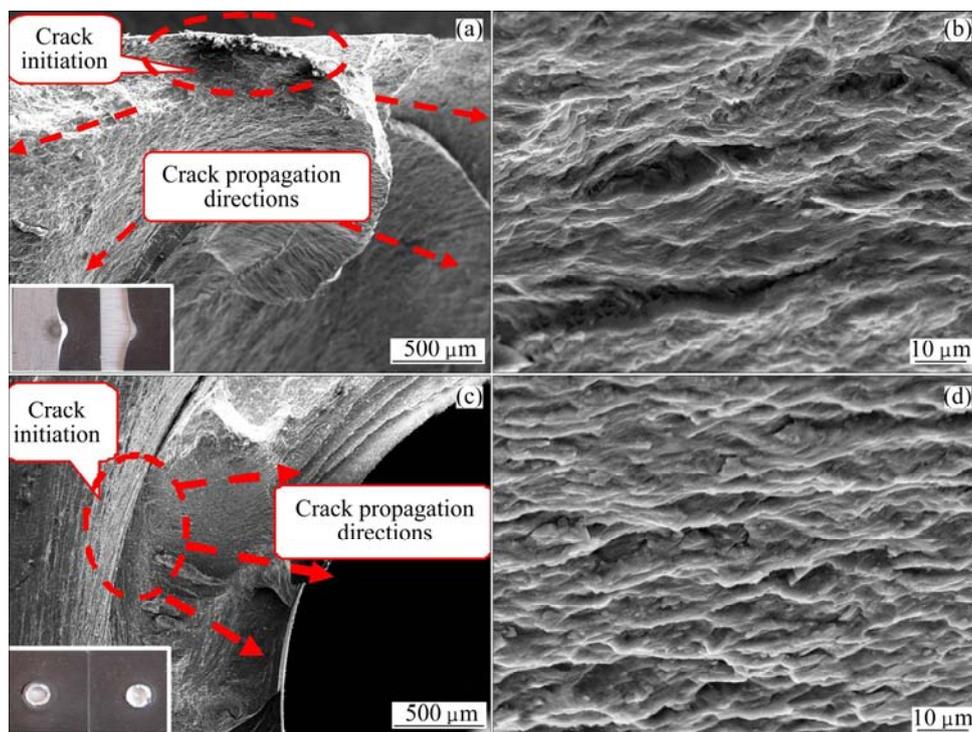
Fatigue fractures and crack propagation area characteristics of FSSW AZ31 magnesium alloy sheet joints: (a), (b) 1 kN; (c), (d) 3 kN
